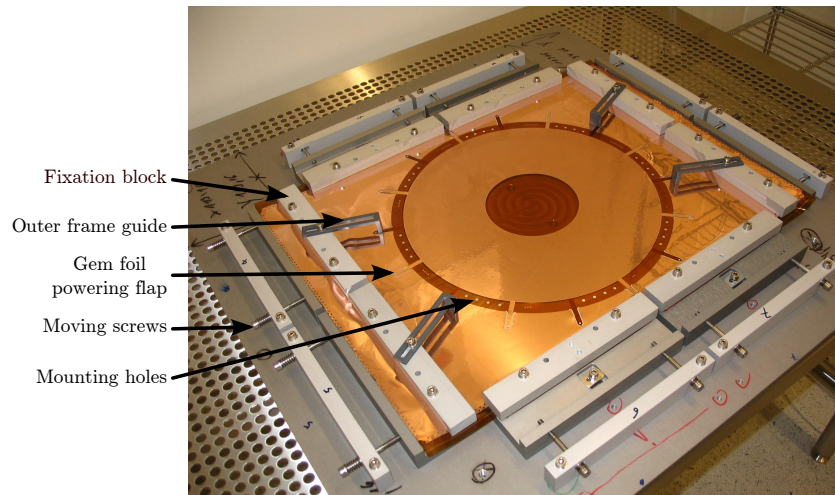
A GEM foil clamped inside the stretching tool during framing. One of the eight sectors is marked by a green line.
